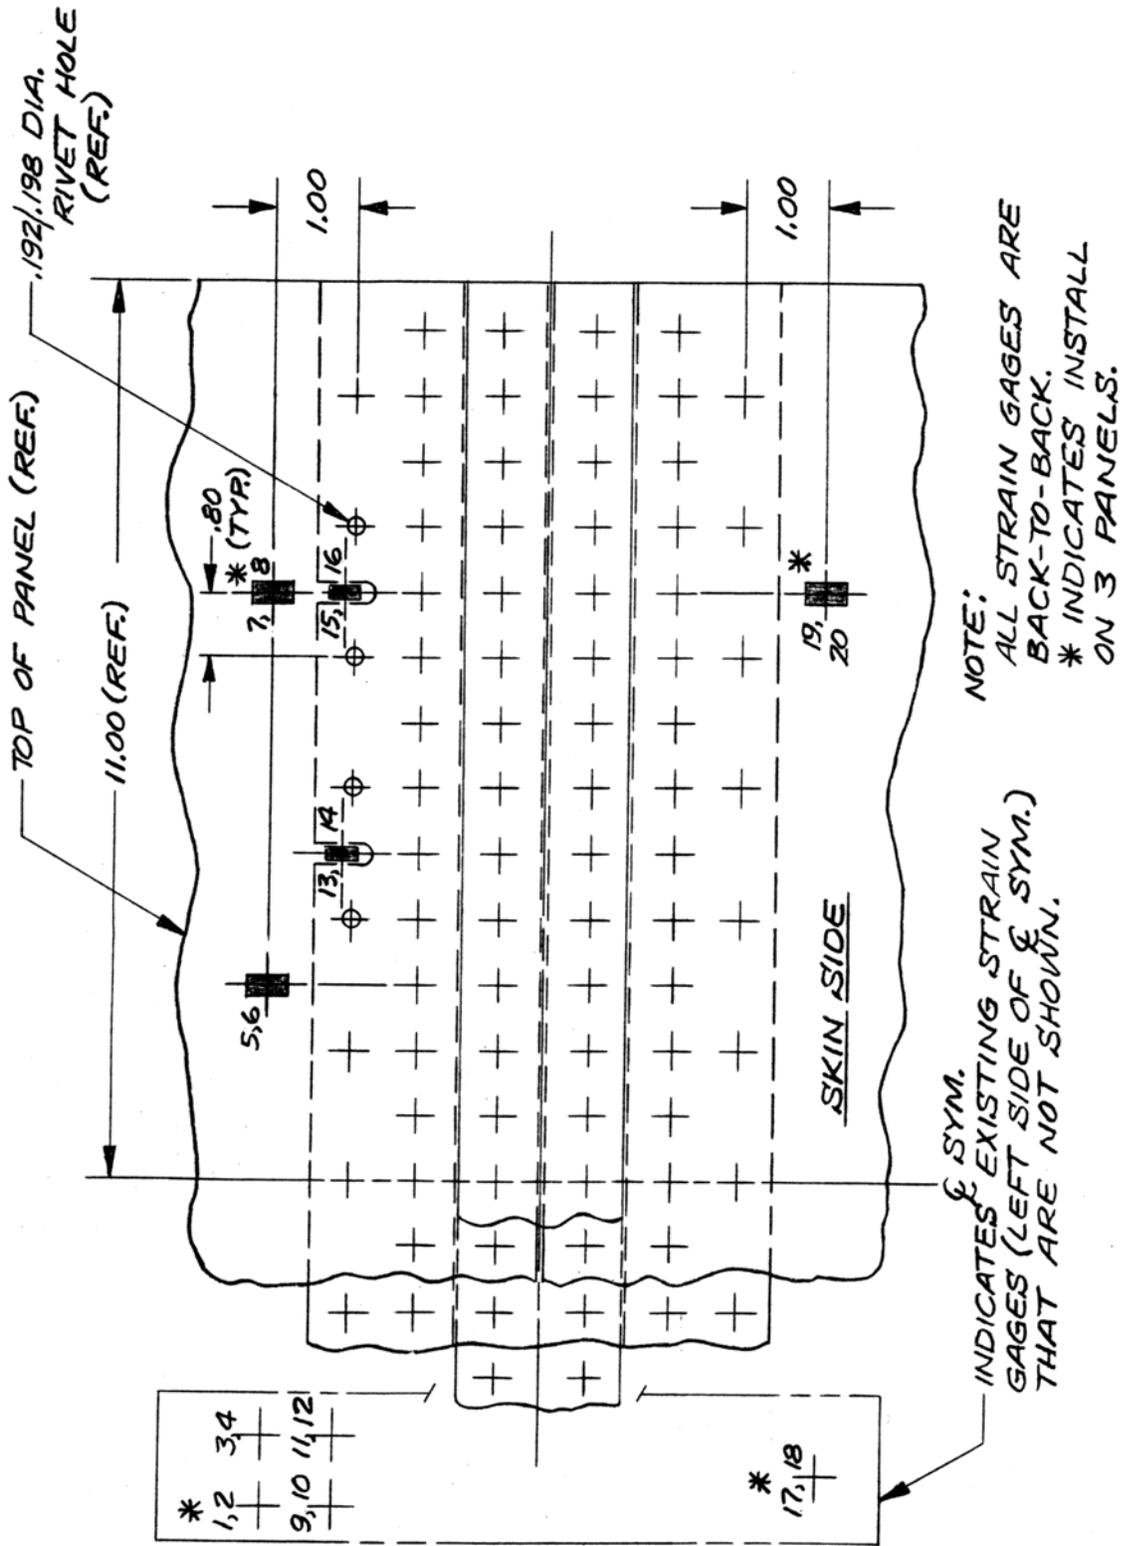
STRAIN GAGE LOCATIONS ON ZB118853-503 PANEL ASSEMBLIES (SPLICE JOINT 3)
